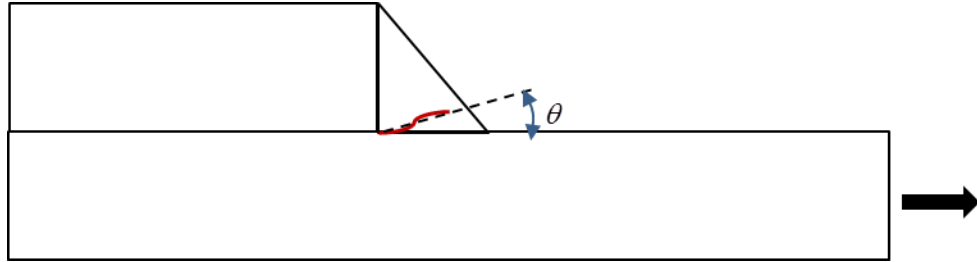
Static shear failure angle on conventional shear strength testing specimen
